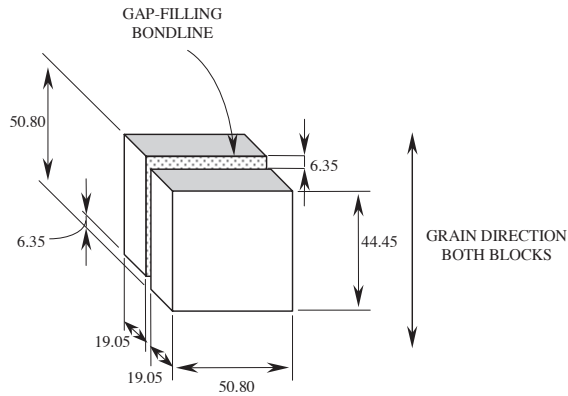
A general view of the component is illustrated in Figure 2 after gluing
